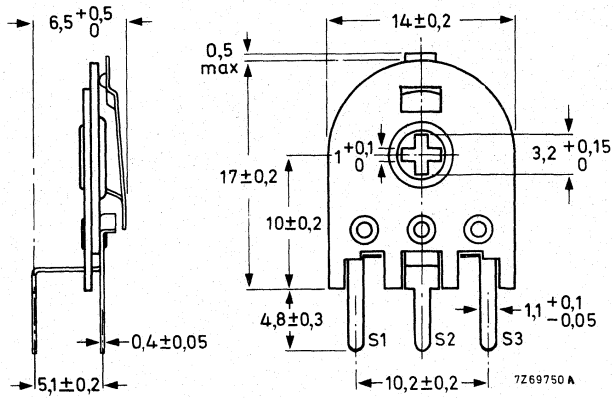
Potentiometer for vertical mounting, with straight printed-wiring pins, 2322 409 052..
